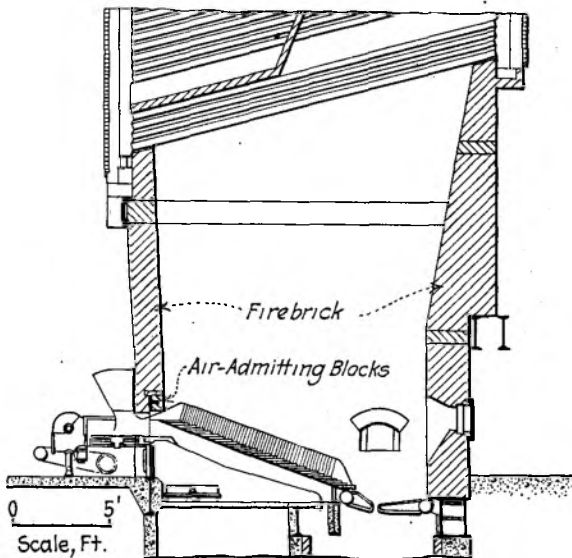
NEW FREDERICK MULTIPLE-RETORT UNDERFEED STOKER
